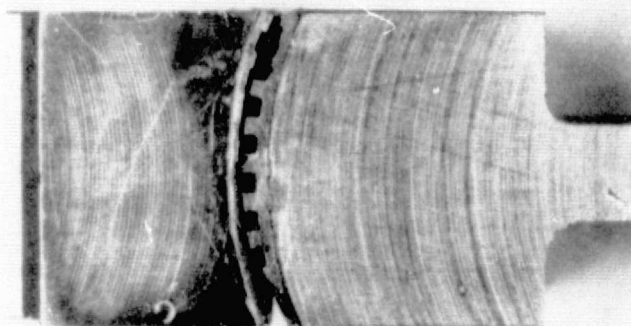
Appearance of Closeout Layer Fracture After Room Temperature Tensile Testing of Segments from Aluminum-Filled Cylinders C-15 and C-18
